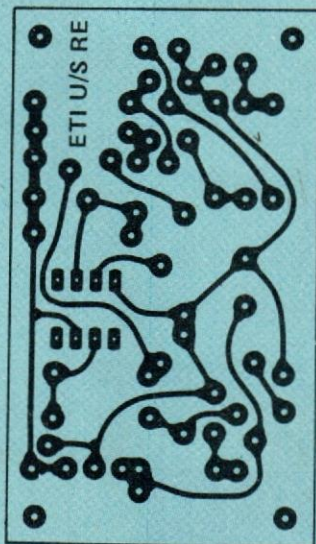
Printed circuit board of receiver. Full size 70 x 40mm.
